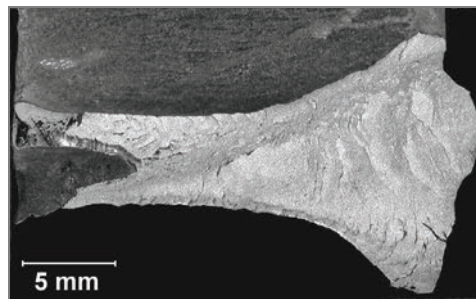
Macroscopic views of crawler ear fracture made of the L35GSM cast steel in the as-cast condition – brittle fracture
